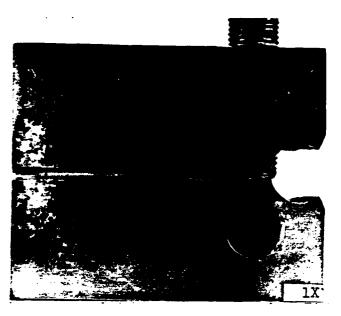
The bolt load IT WOL compact tension test specimen used in this investigation.
